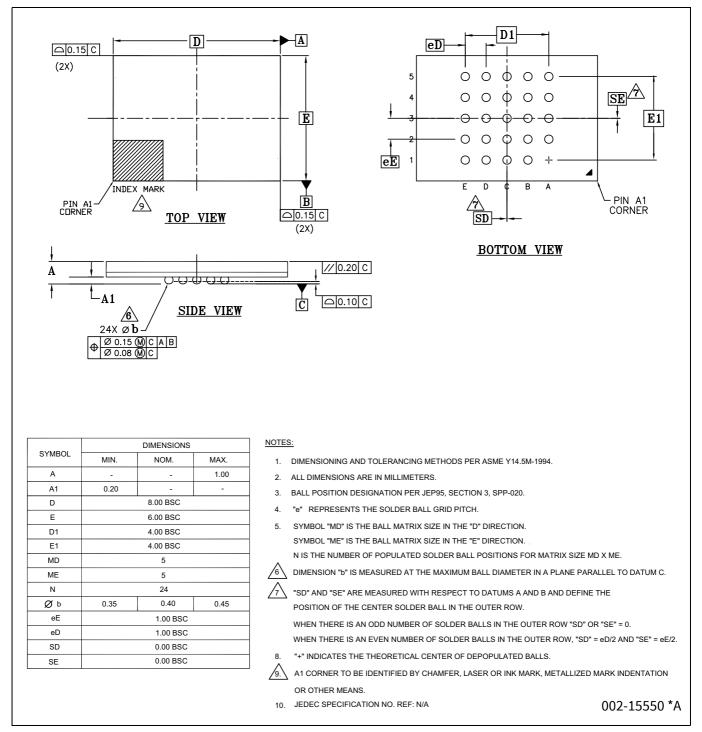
24-ball FBGA, 6 × 8 mm, 5 × 5 ball footprint, Top view
